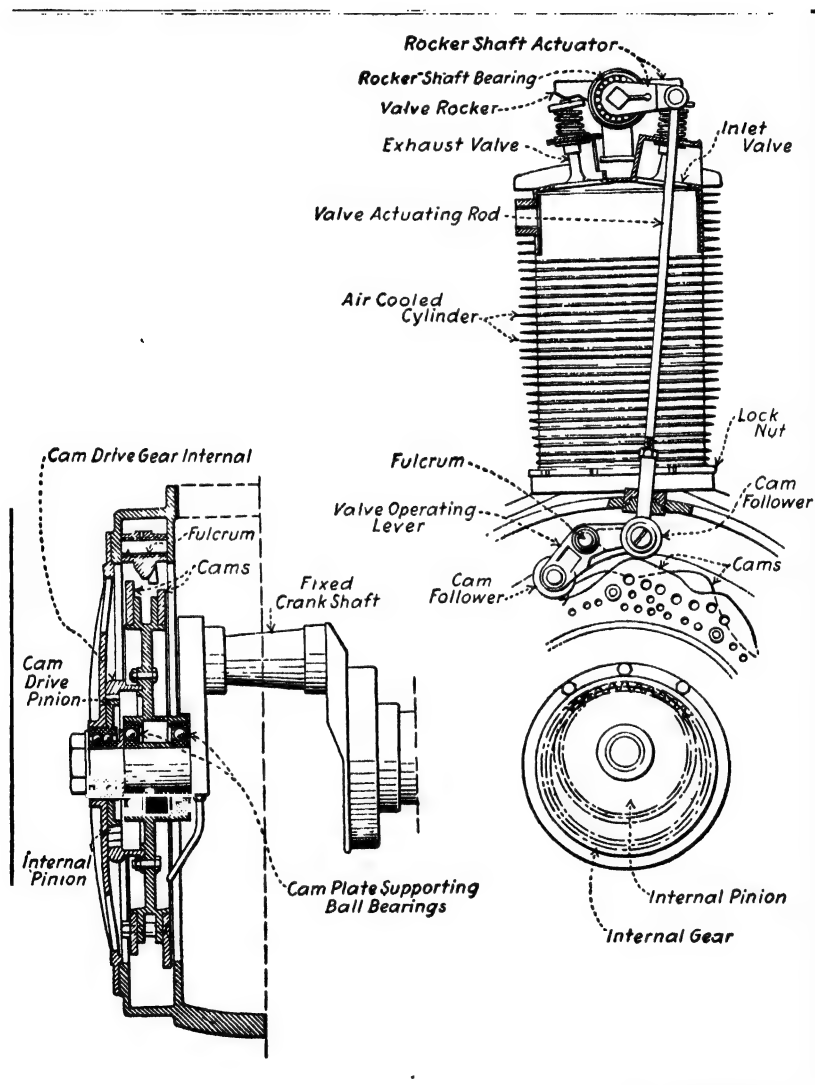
How the Cams of LeRhône Motor Can Operate Two Valves with a Single Push Rod, by Using Centrally Fulcrumed Double Cam Followers.
